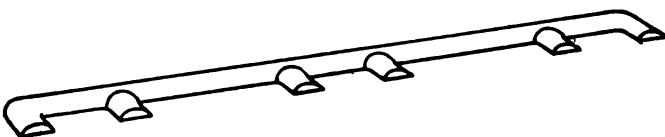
Master Pattern of Gate for Holder Frame Cover
